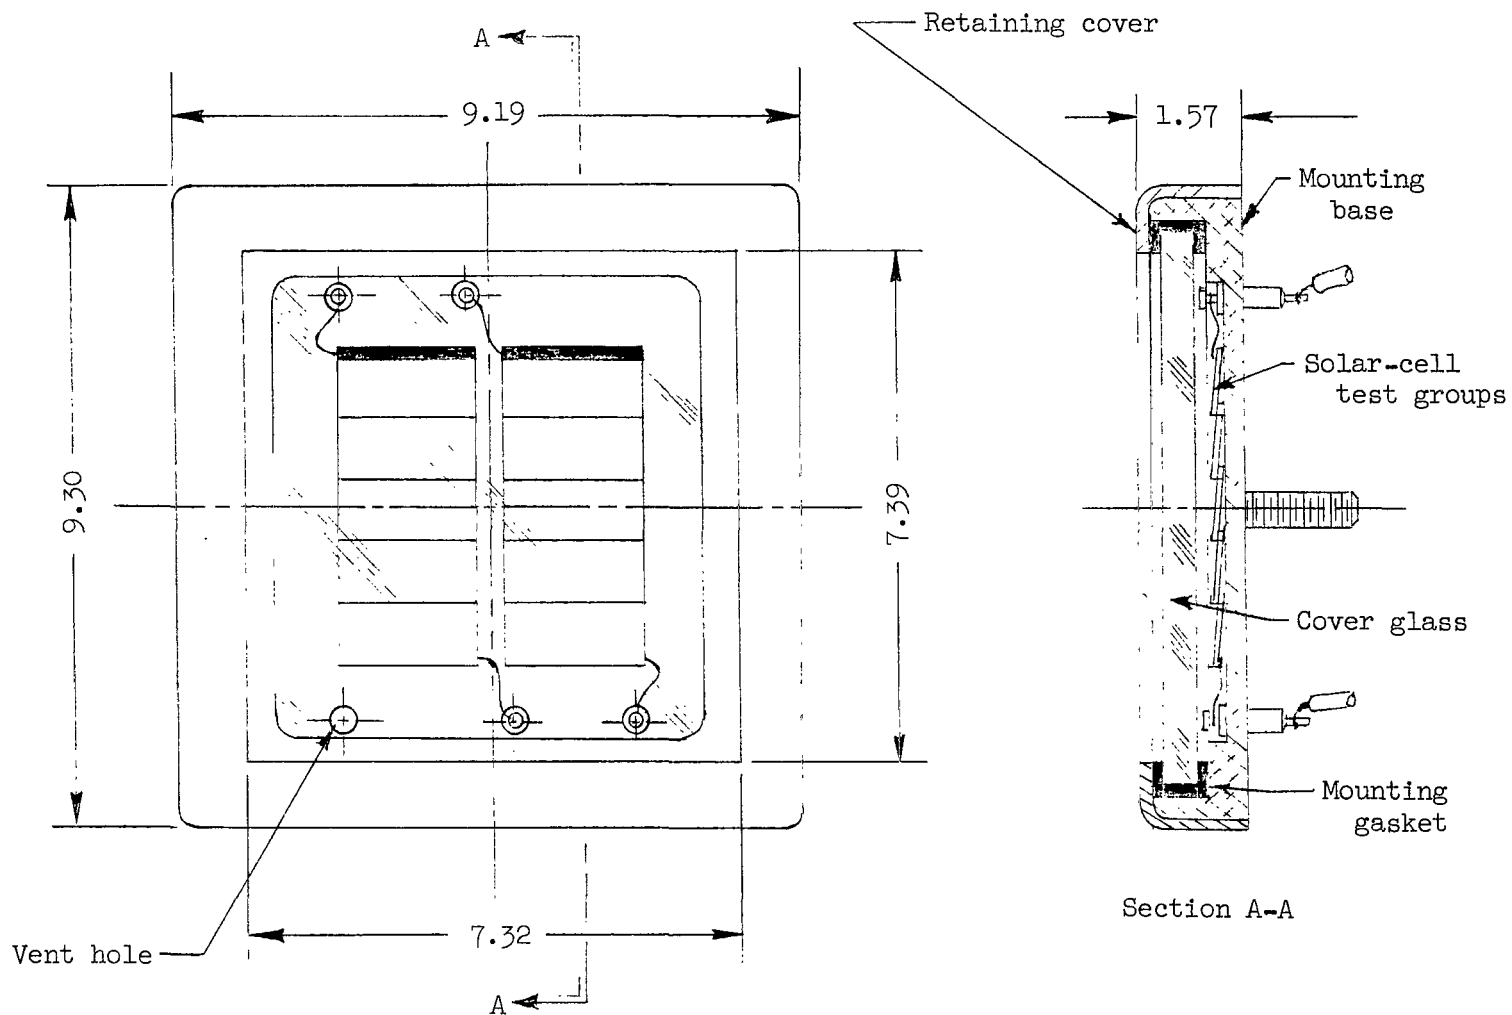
Test solar-cell assembly. All dimensions are in centimeters.
